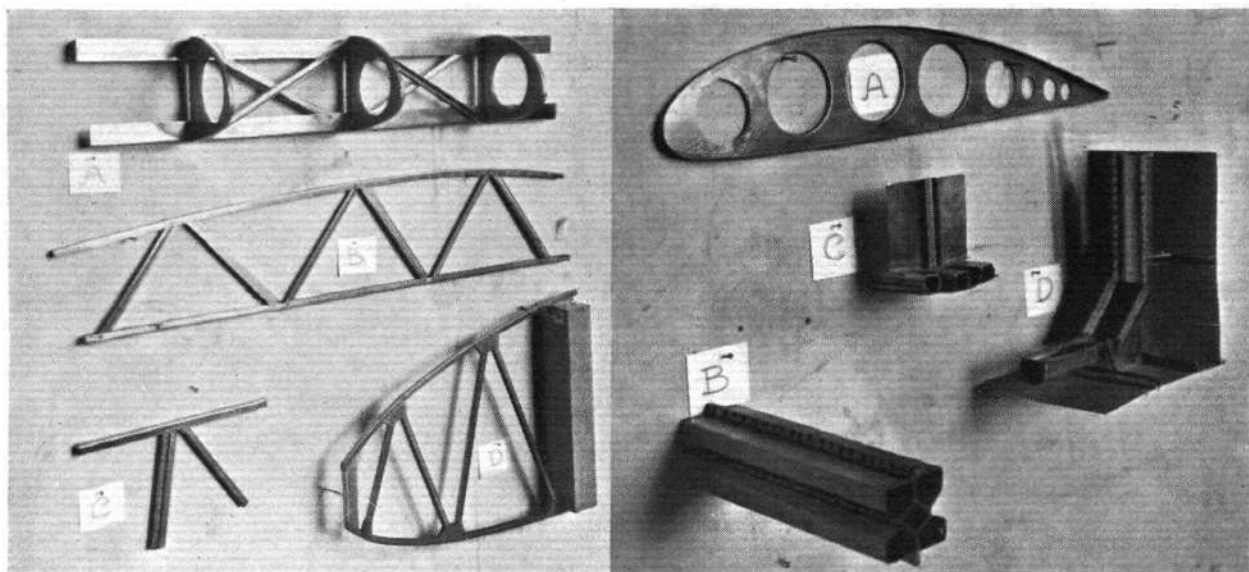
, SPECIMENS OF SHOT-WELDED COMPONENTS : On the left, some lattice members of wing structure. On the right, a wing rib and some shot-welded compression members.
